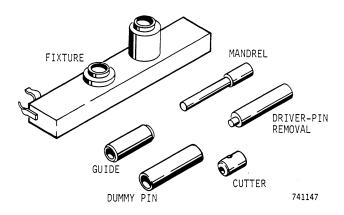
D62919 Tool Kit for Wrist Pin Removal and Installation
